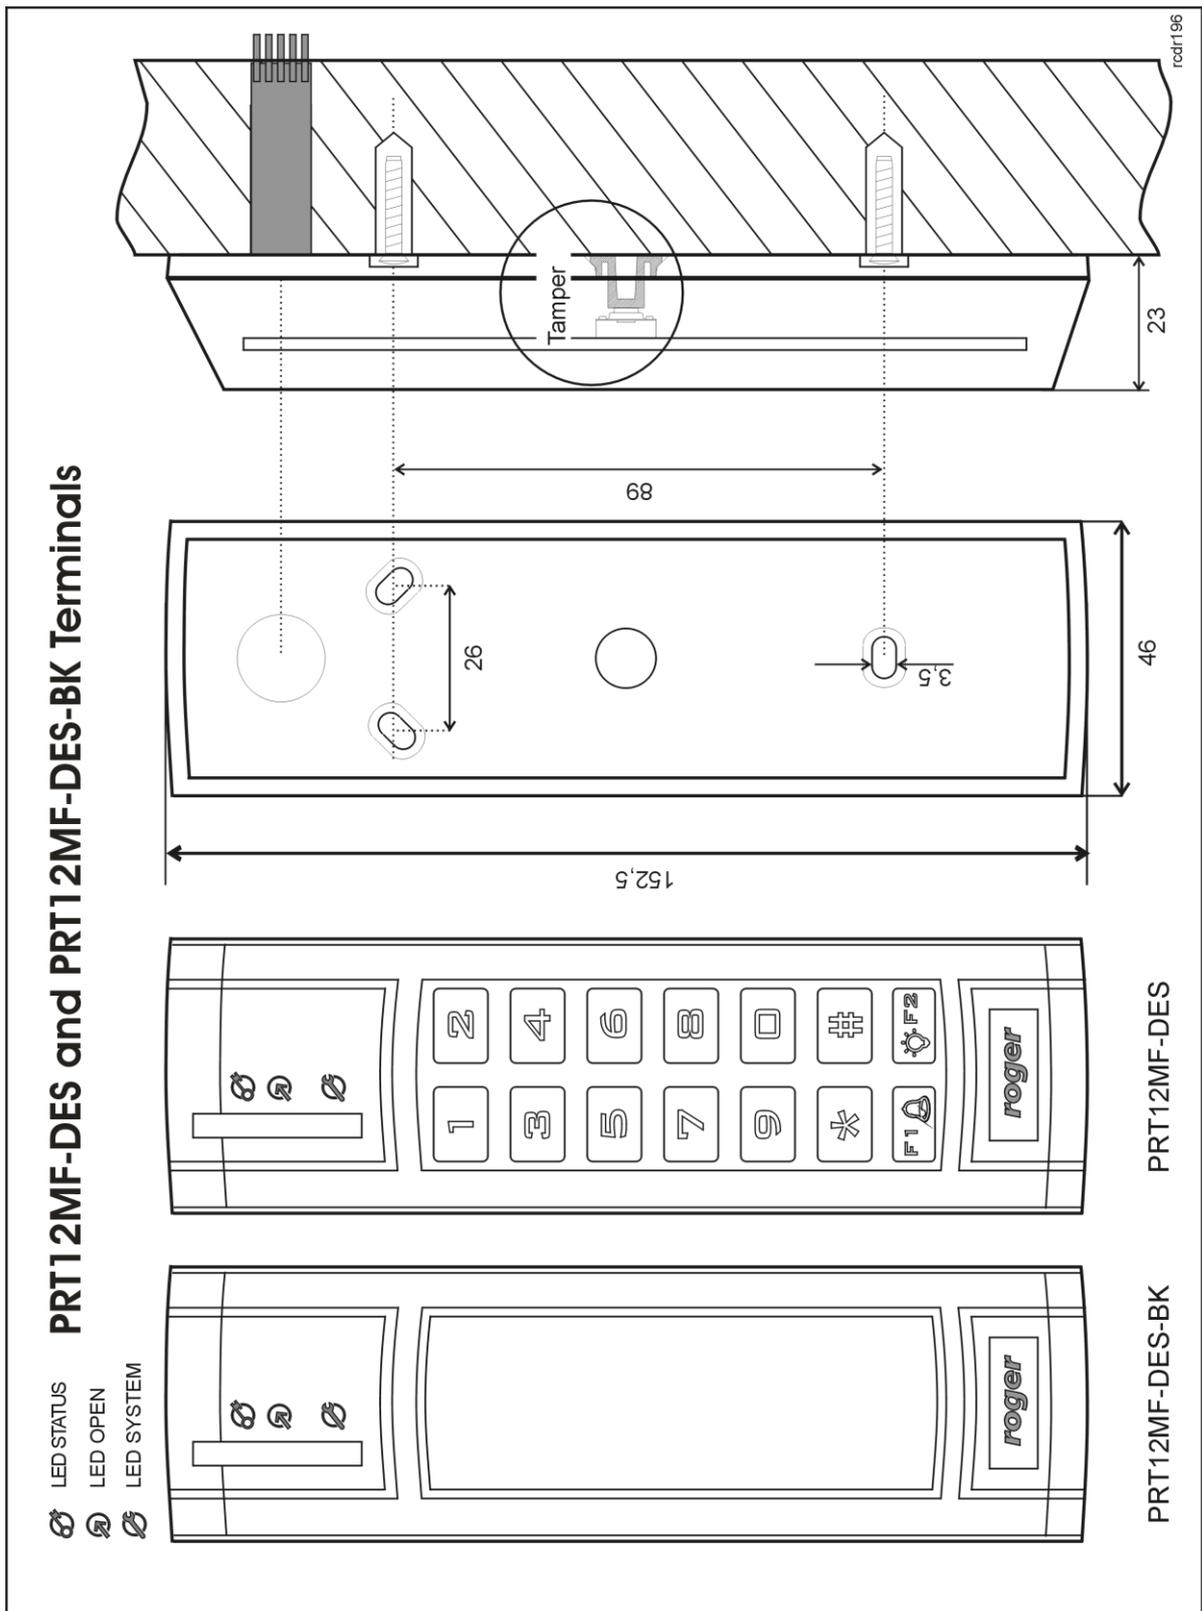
Dimensions and tamper details, standard (low profile) bottom enclosure
